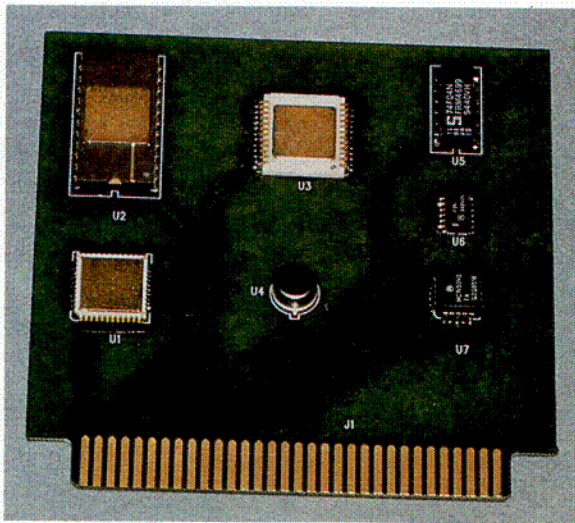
The component packaging tests featured both PTH and SMT component packages.
